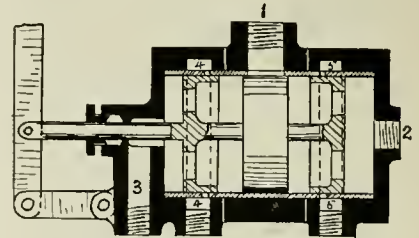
SECTION OF HYDRAULIC CONTROL VALVE.
